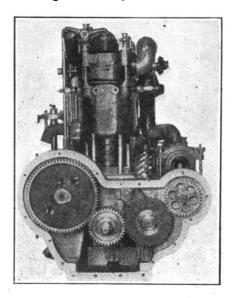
FRONT END OF KNOX MOTOR WITH GEAR COVER REMOVED
